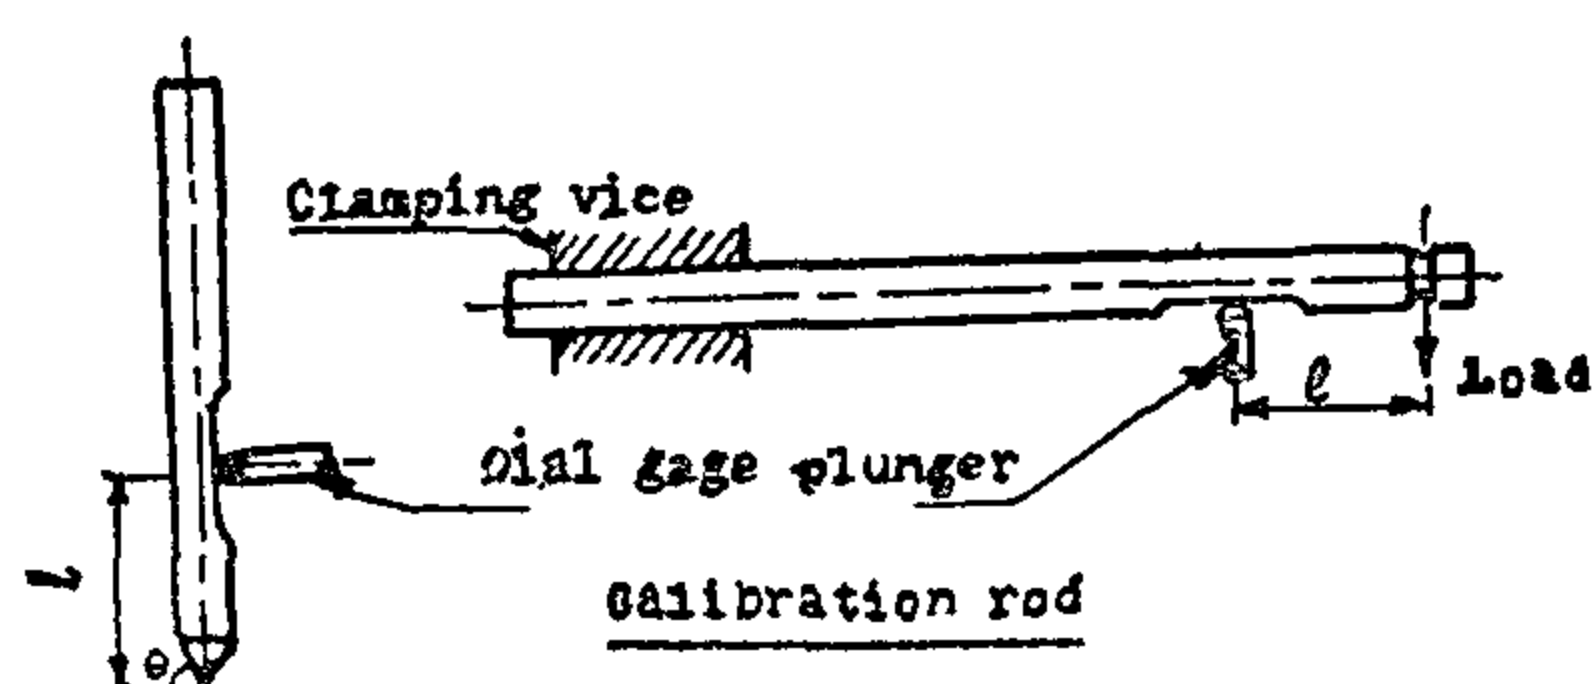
Schematic representation of the tool steel indenter and the calibration rod.
